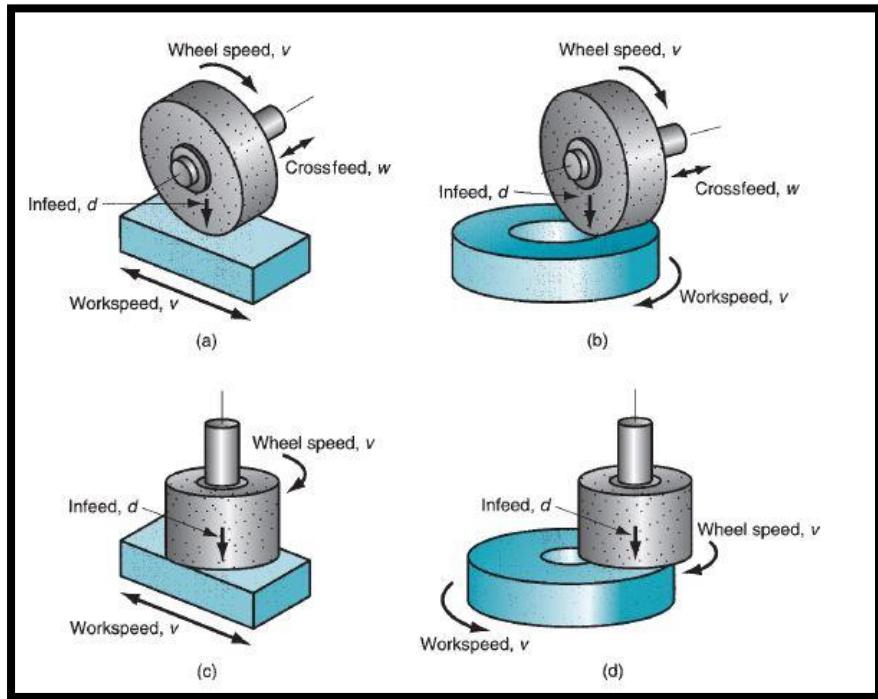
Four types of surface grinding: (a) horizontal spindle with reciprocating worktable, (b) horizontal spindle with rotating worktable, (c) vertical spindle with reciprocating worktable, (d) vertical spindle with rotating worktable [12].
